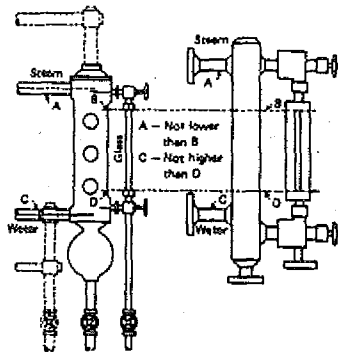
TYPICAL ARRANGEMENT OF STEAM AND WATER CONNECTIONS FOR A WATER COLUMN
